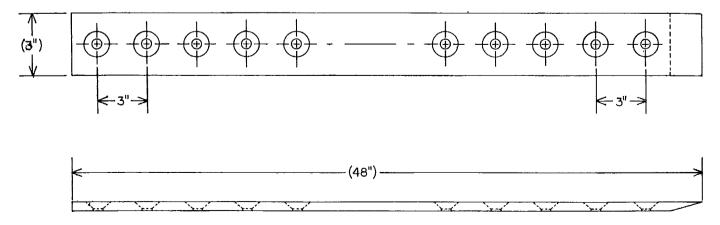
Top and side views of one of the longer modified leaf springs.
